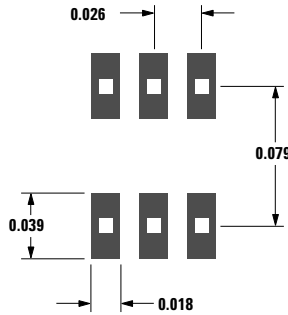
Recommended PCB Pad Layout for Avago Technologies' SC70 6L / SOT-363 Products.
